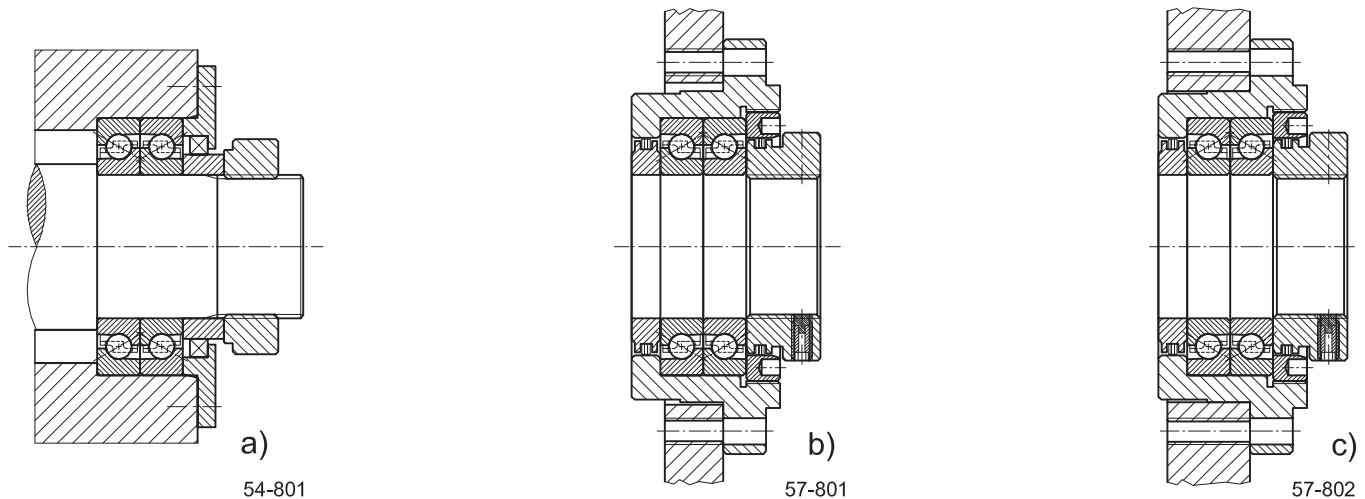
Development to easier to machine and to mount applications for ball screw supports.
